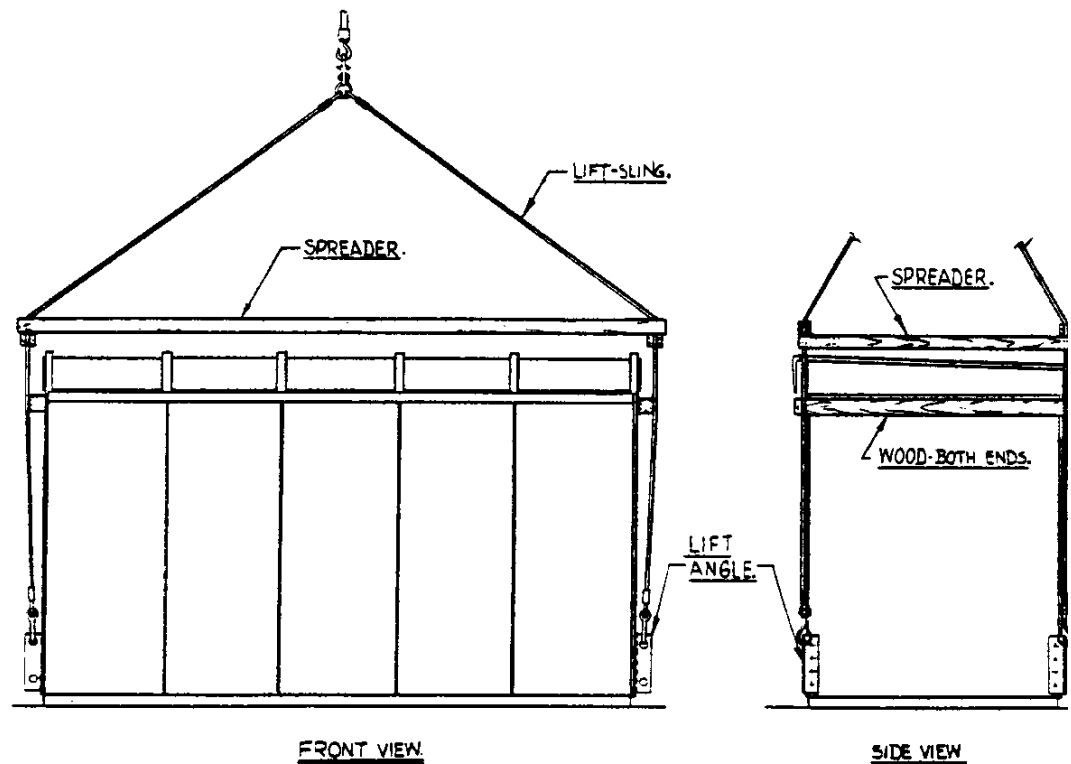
Installation Details for Outdoor Power/Vac* Metal-clad Switchgear
